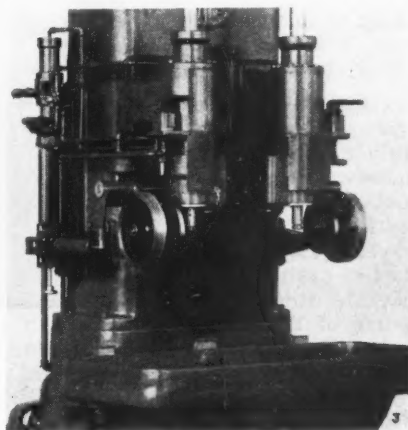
Two-spindle drill equipped to drill crankshafts for balancing. Either dial can be set so that the drill will stop at the required depth.
